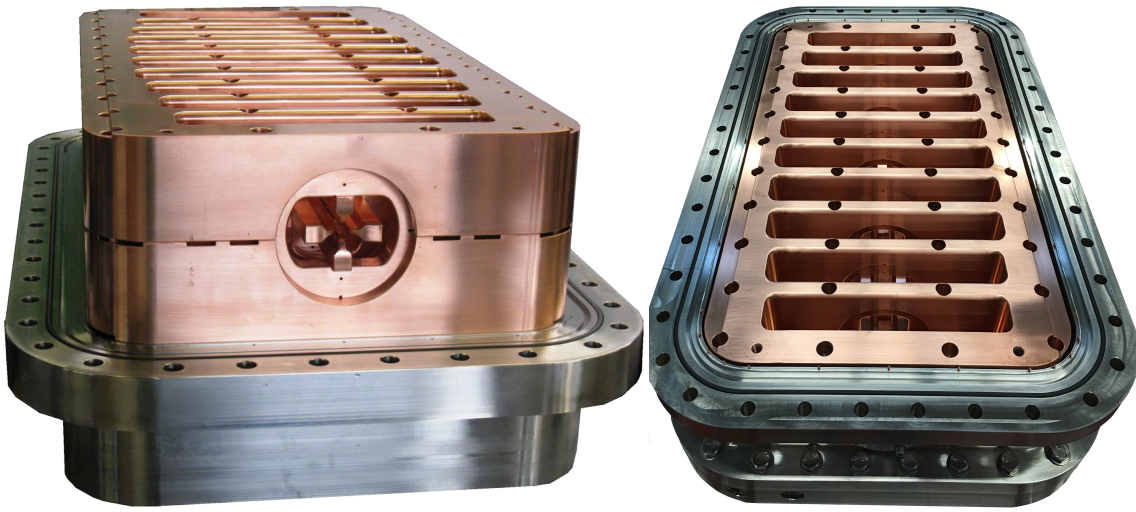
Isometric view of the Ladder RFQ before (left) and after (right) the assembly of the middle frame.
